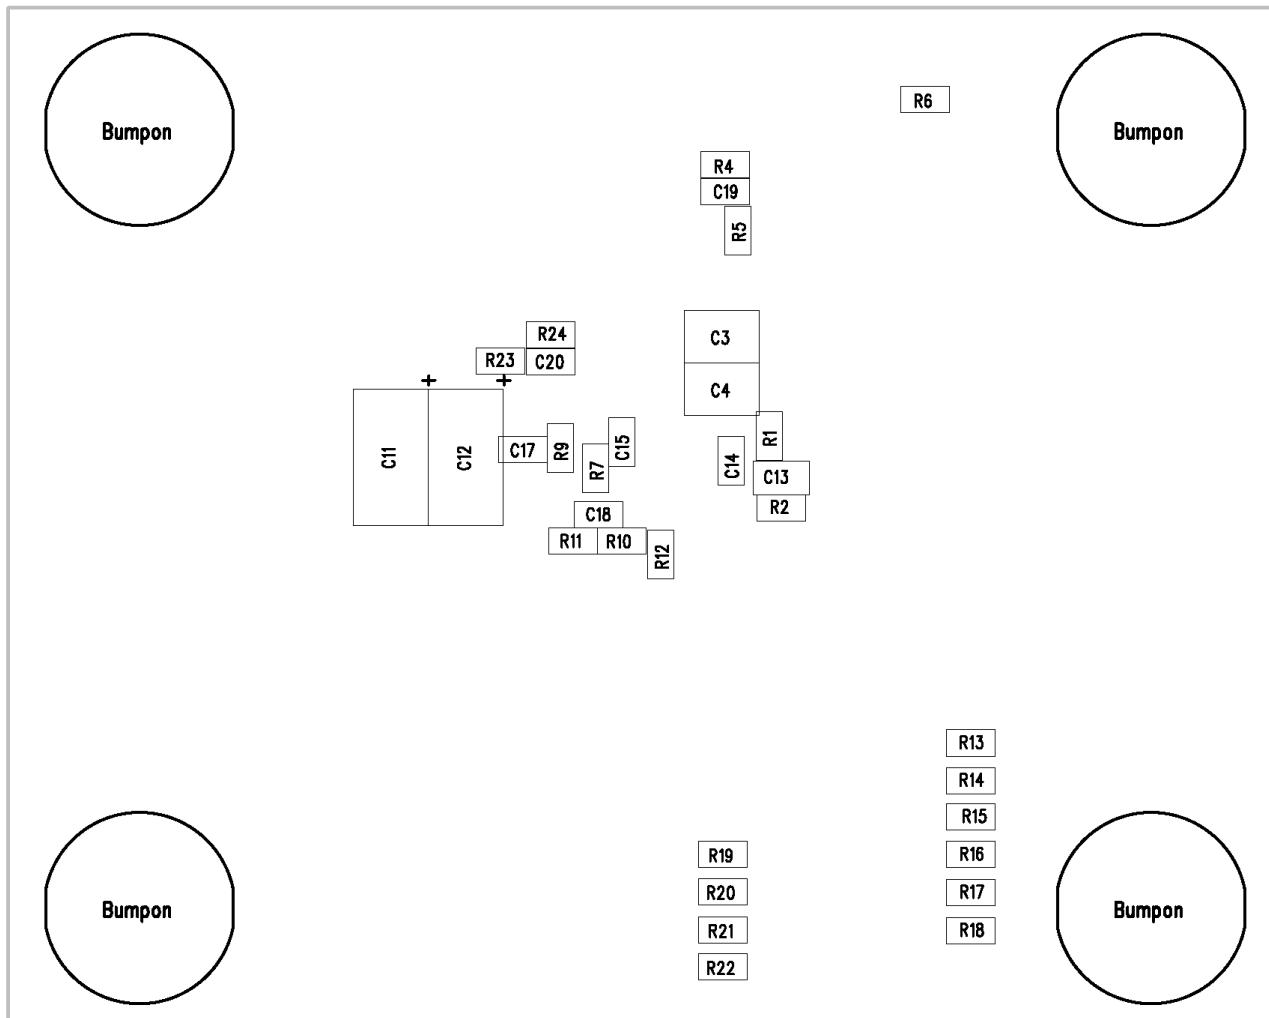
TPS53319EVM-136 Bottom Assembly Drawing
